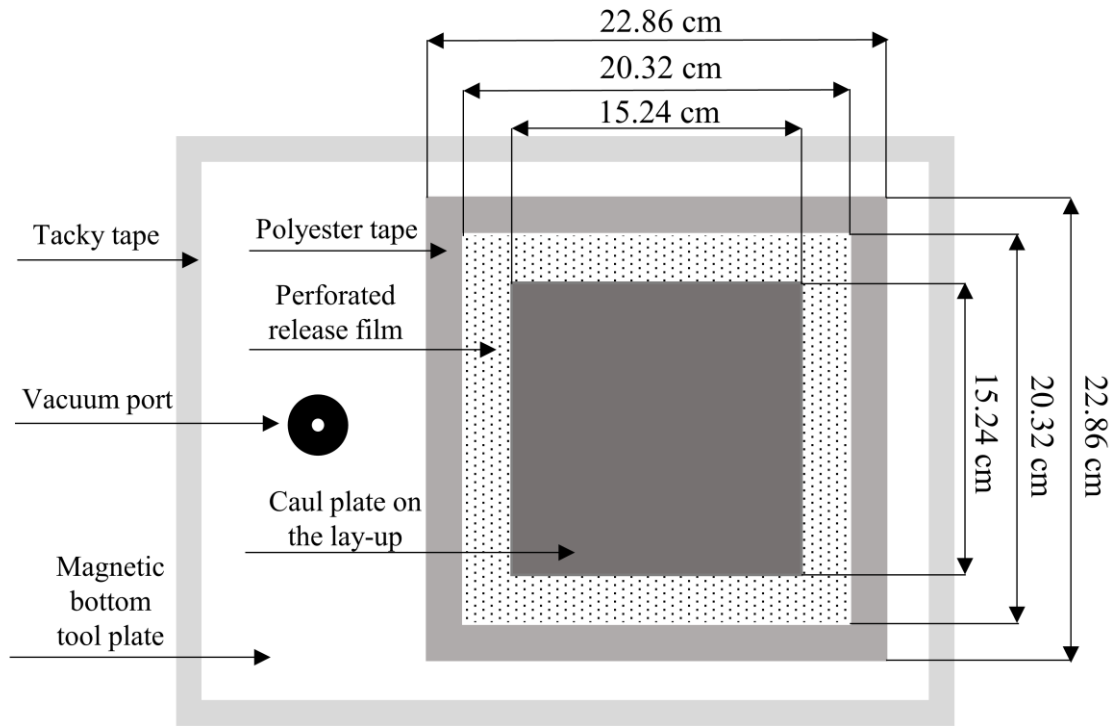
Schematic of the wet lay-up/vacuum bag assembly on the magnetic bottom tool plate used in fabricating the laminates.
